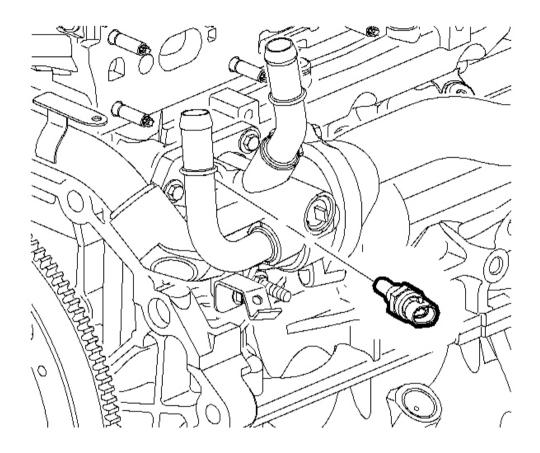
View Of Electrical Connector To Coolant Temperature Sensor Courtesy of GENERAL MOTORS CORP.
